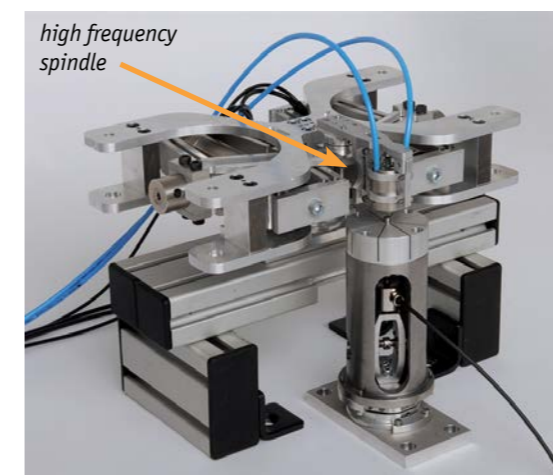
Possible configuration of a micro drilling setup with a high speed spindle and miniaturized mounting brackets.
